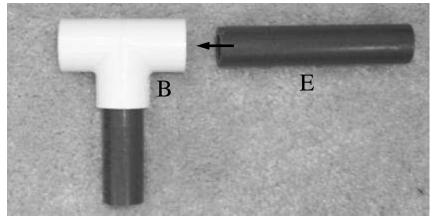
Assembly of the Small wheelchair (Step 3).
